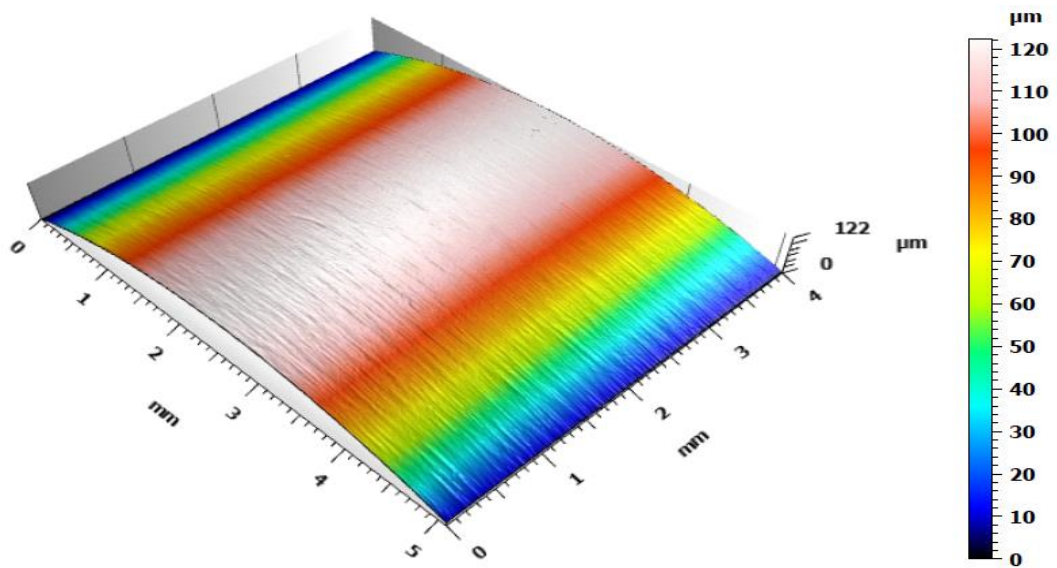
Budget Bearing, inner raceway 3D surface scan.
